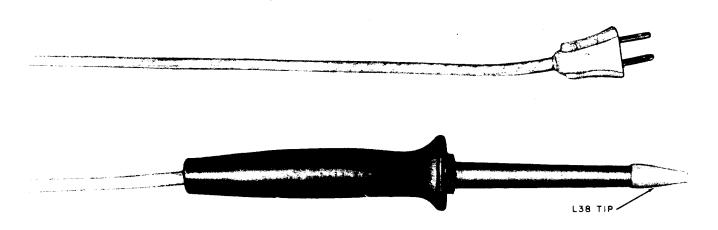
KS-14440 Soldering Copper—L16 or L17 With L38 Tip
